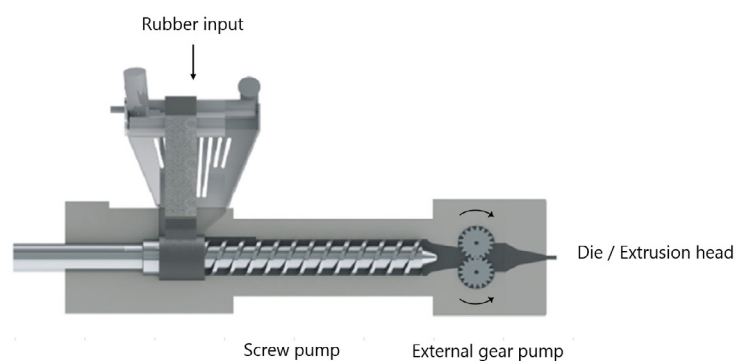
The rubber extrusion machine and the location of the external gear pump in it.
